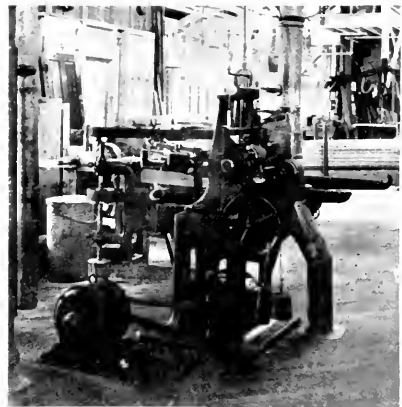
SASH AND DOOR TENONER DRIVEN THROUGH A FLEXIBLE CHAIN BY A FIVE HP, 1735 R.P.M. MOTOR
